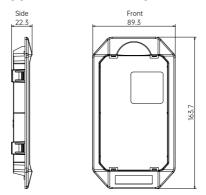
Large-size operating panel mounting base (unit: mm)
